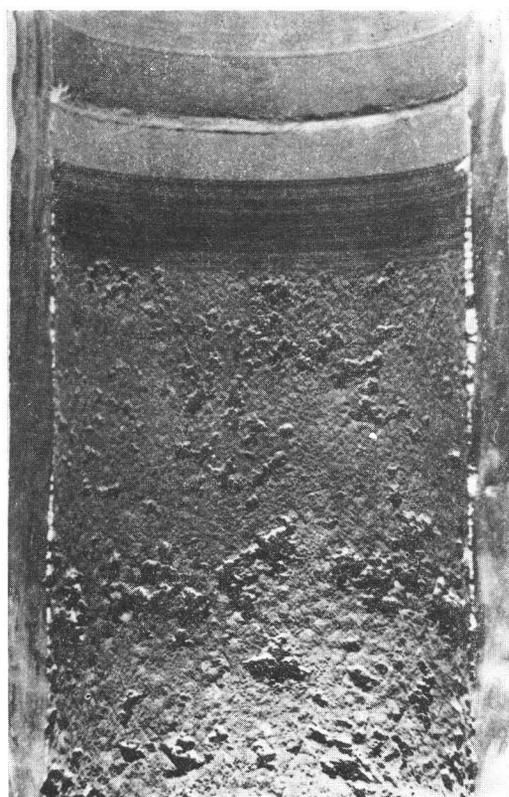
Carburation of an HK40 ethylene furnace tube. Note the severe damage on the unmachined part of the tube and the absence of attack at machined zone near weld.
